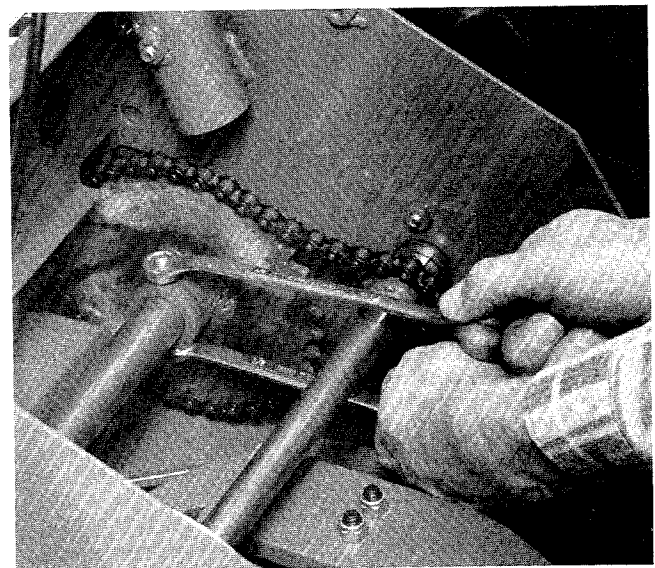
Reinstalling the sprocket on the jackshaft.
